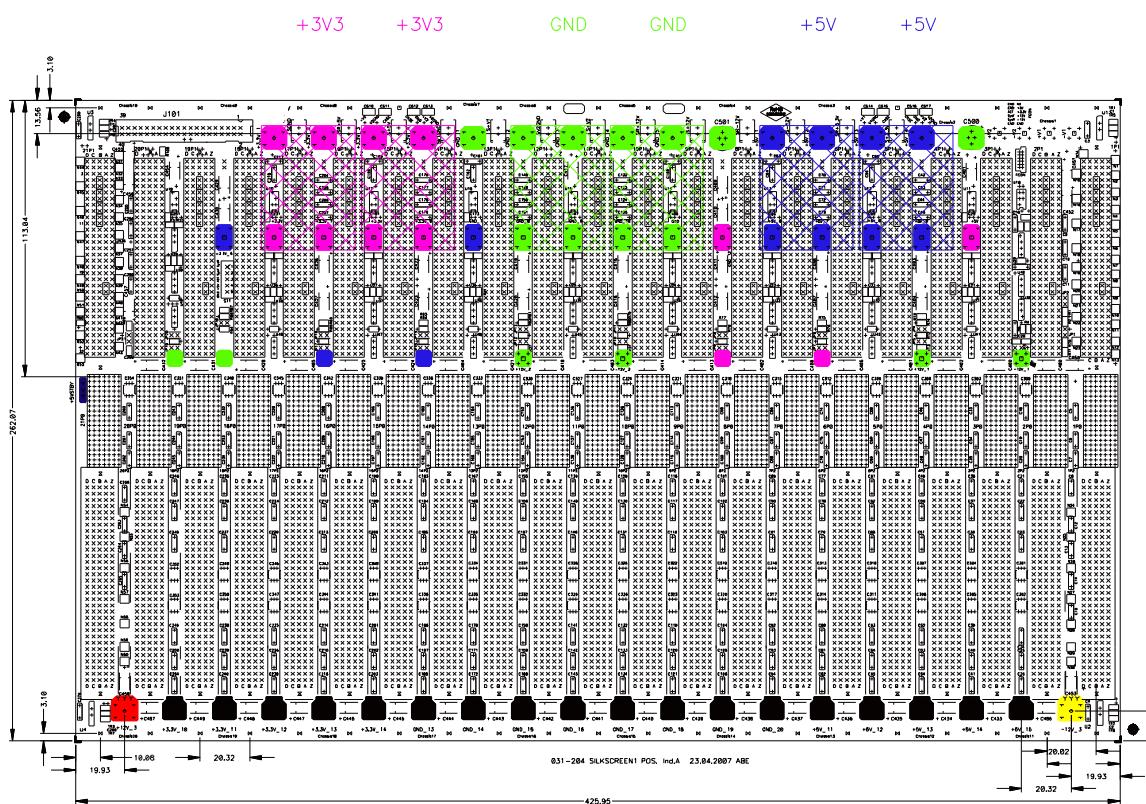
Mod VME8100 Backplane view from SMD components side
